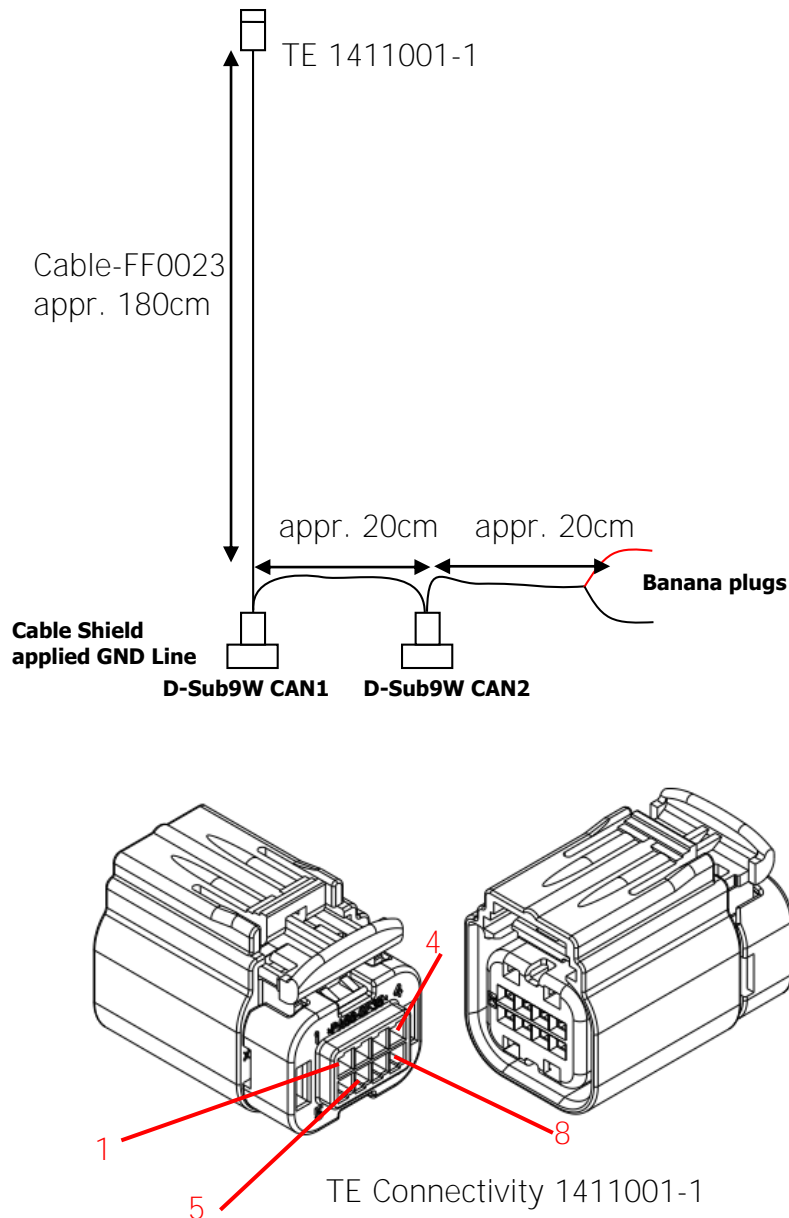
Diagram of cable-FF0023 and rear view of female counterpart to be connected to sensor
